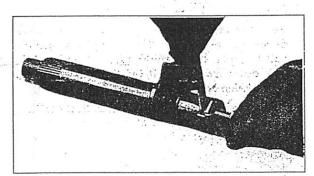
Checking Sector Shaft Lash Adjuster End Clearance
